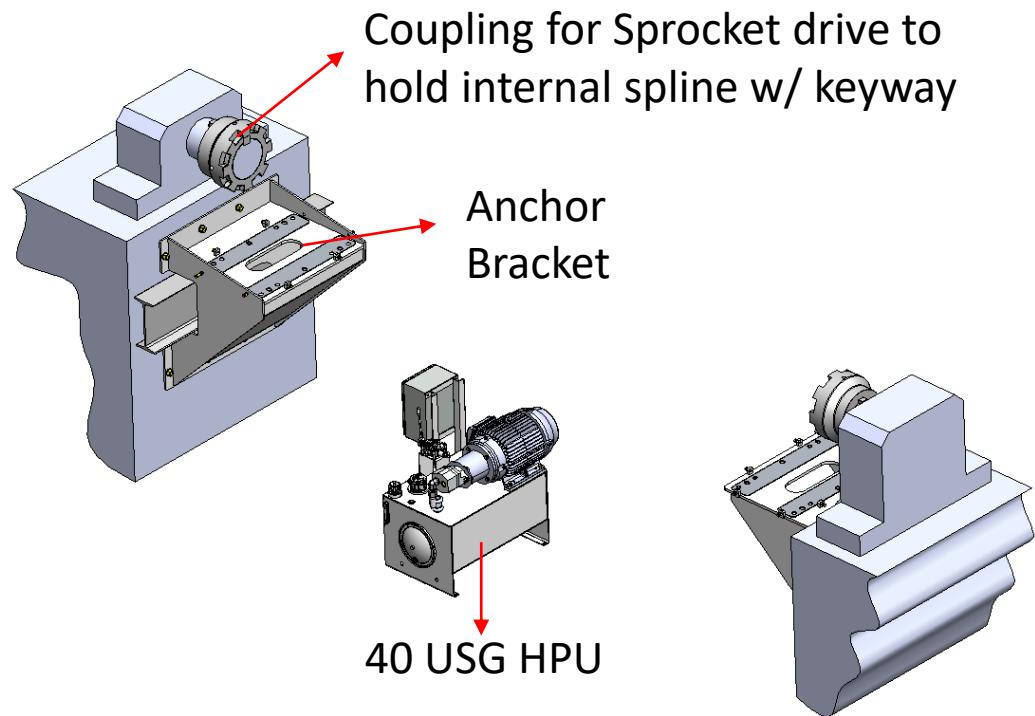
; Inching drive mechanism for controlled circumferential welding
